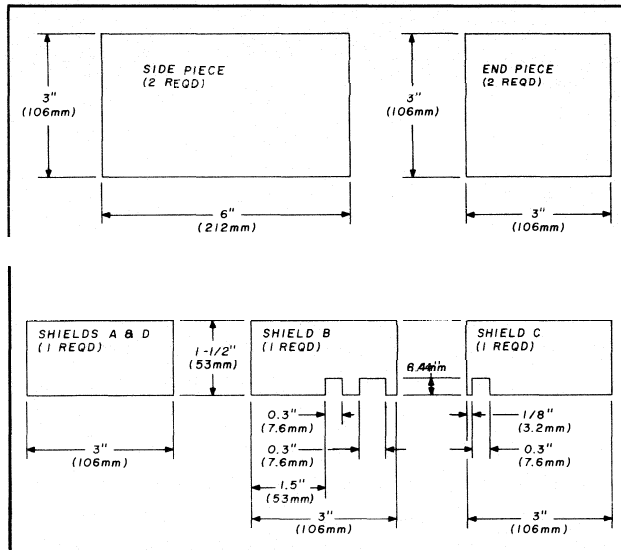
Shield, side, and end pieces for the VXS constructed from double-clad PC-board stock. Covers (top and bottom) are 3 $\frac{3}{8}$ × 6 $\frac{1}{4}$ inch (8.25 × 15.9 cm) PC-board pieces.
